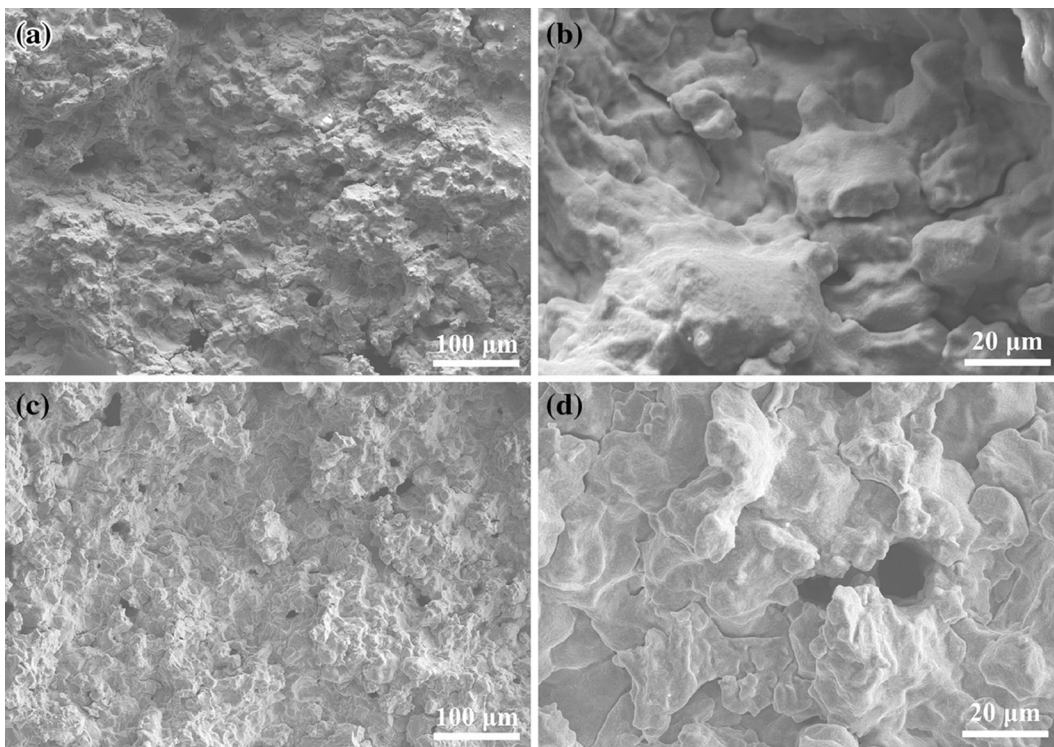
Fracture surfaces of specimens tested at 1473 K (1200 °C): (a) and (b) 160 μm , (c) and (d) 37 μm .
